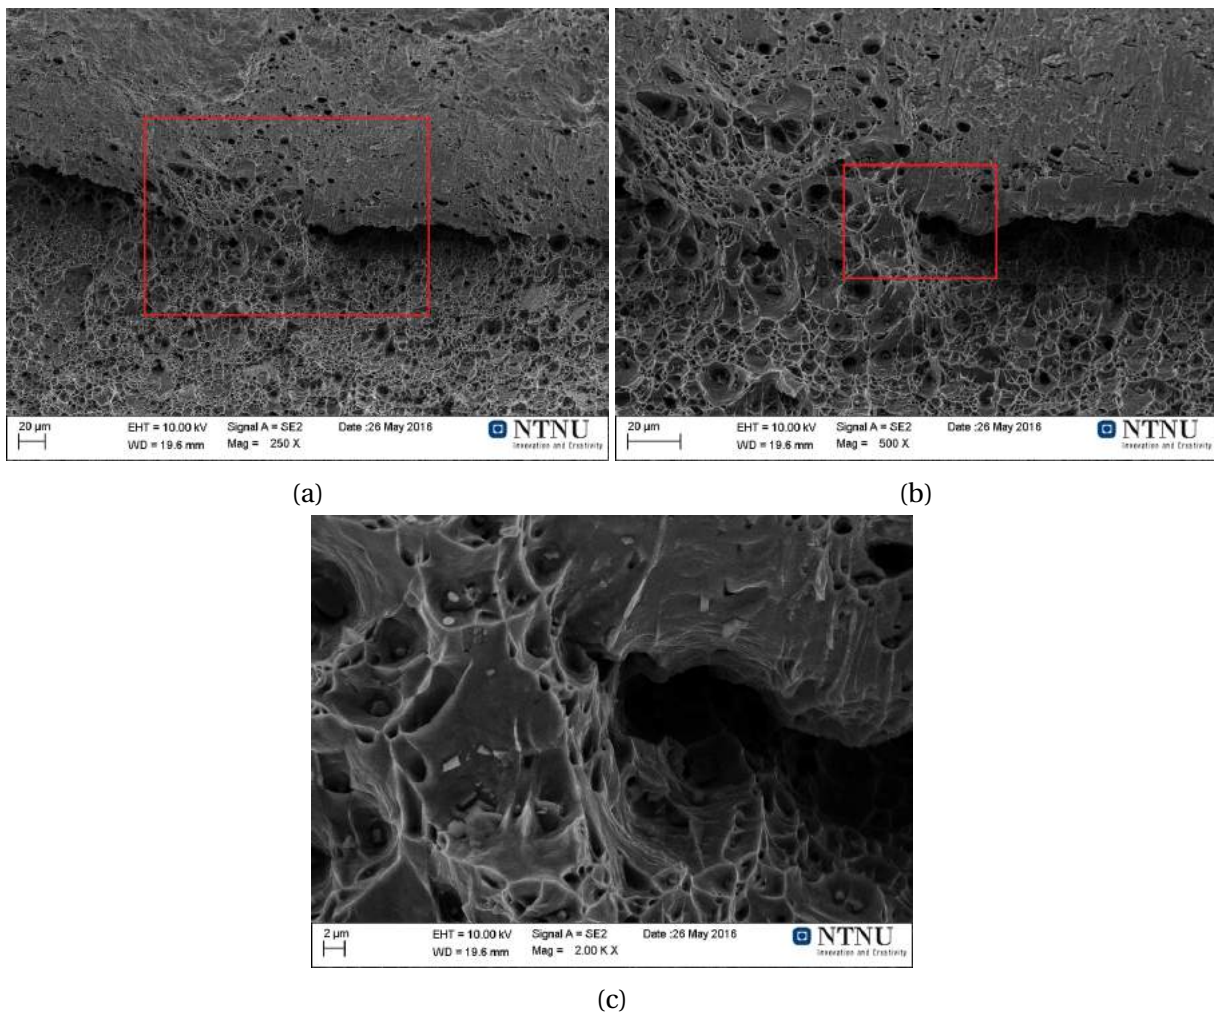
Fracture surface of press extruded Al-10%Mg.
